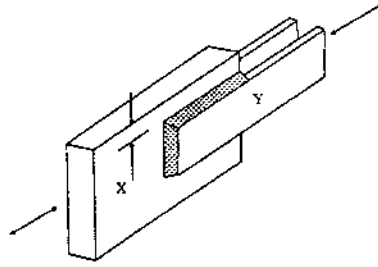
UKDEn Load Carrying Fillet and T Butt Weld 3
